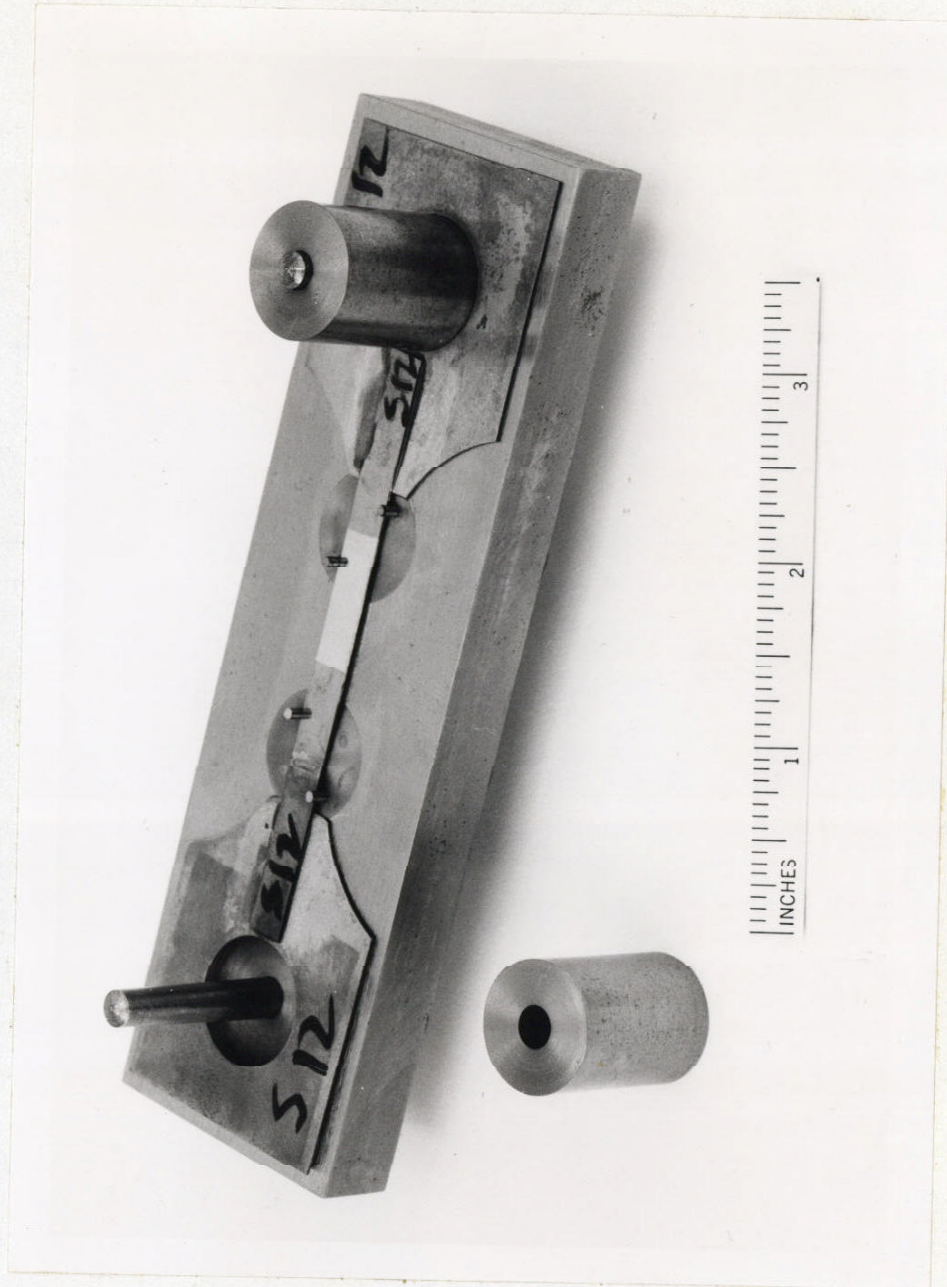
Single crystal alignment fixture used during fabrication of test specimens.
